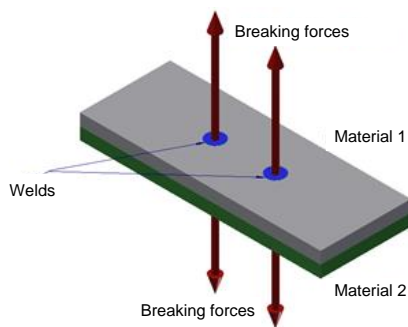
Sample of a welded joint subjected to destructive forces.
